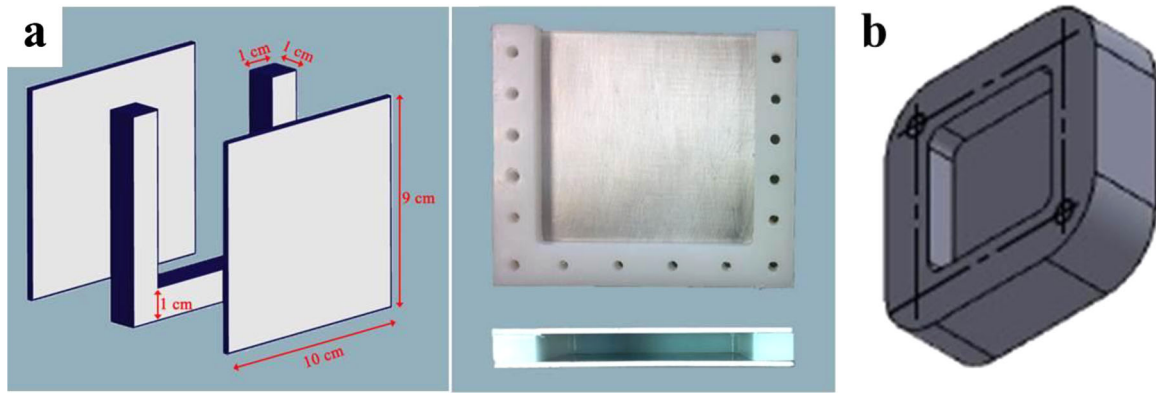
a Diagram showing the different parts of mould 1 and its image. b Design of mould 2
